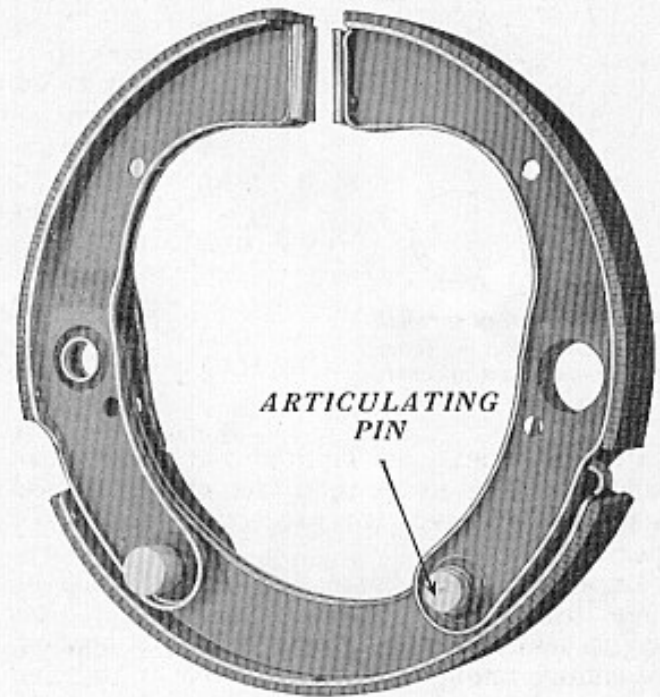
Eleven-inch type Bendix shoe assembly which has only one adjustable anchor pin. Note stub auxiliary shoe pin
